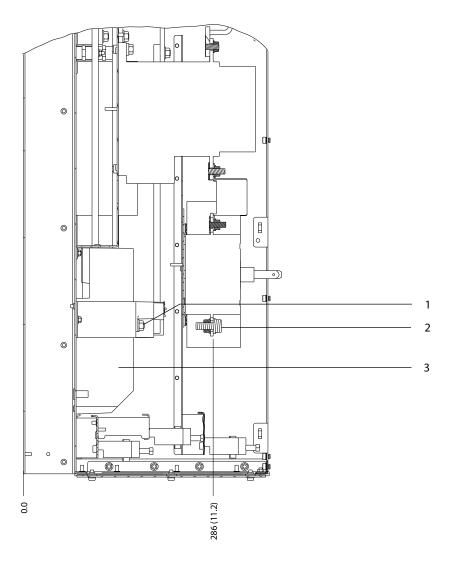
D6h Terminal Dimensions with Contactor Option (Side Views)
